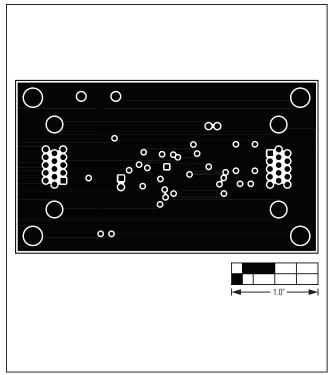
MAX14895E EV Kit PCB Layout—Inner Layer 3
